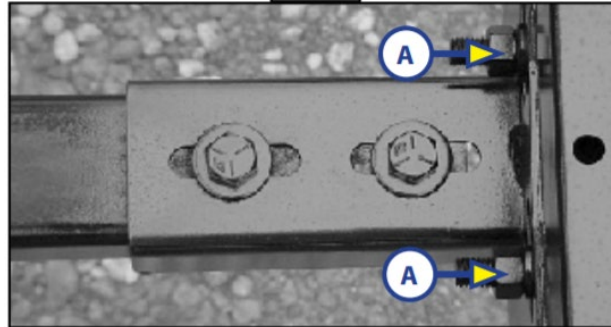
Room Bar mounting bracket - idler side. The drive side will not have adjustments on the guide rail.
